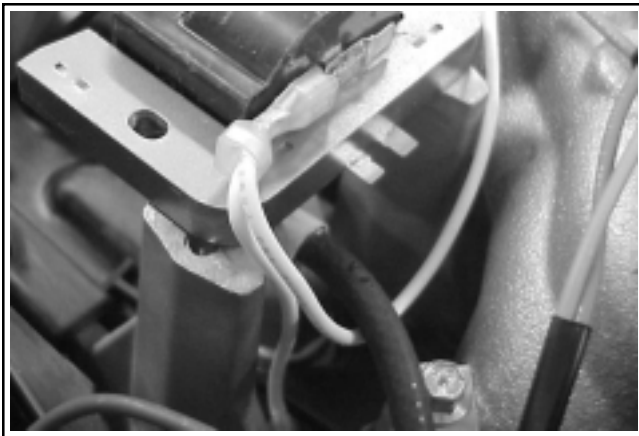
Ignition Module Kill Lead Mounting #1 Side.
